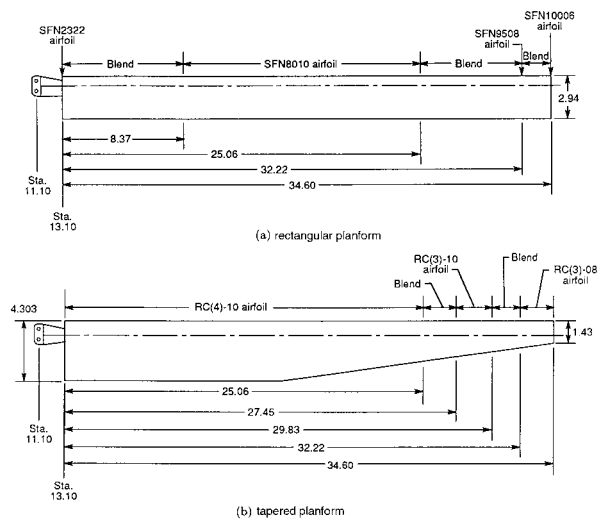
Geometry of Mach-scaled model rotor blades. All dimensions are in inches.
